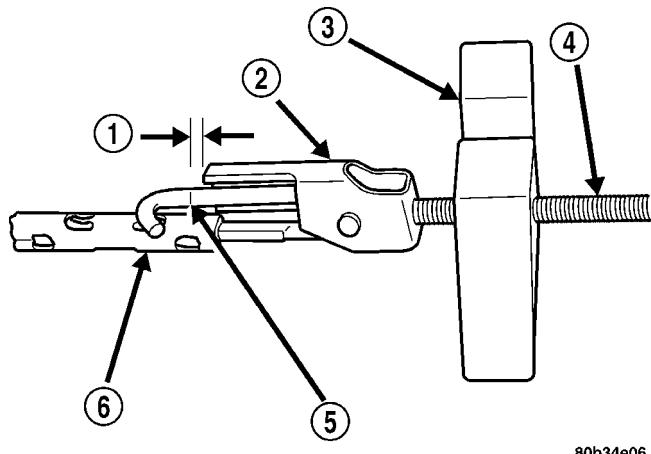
Adjustment Mark On Cable Tensioner Rod
